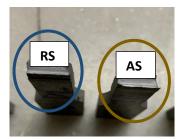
Fracture of concave shouldered MX-TRIFLUTE tensile specimen at 1200 rpm
